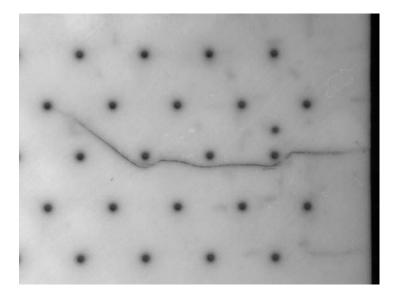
Crack in a co-fired separator caused by improper binder burnout. The heating rate was too high during the binder removal stage of the co-firing cycle.
